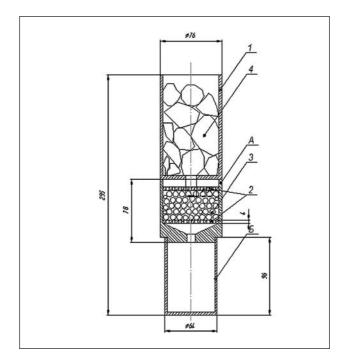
Assembled filtering equipment 1 - crucible, 2 - bottom and top grids, 3-filtering elements, 4 - furnace charge, 5 - metal reservoir
